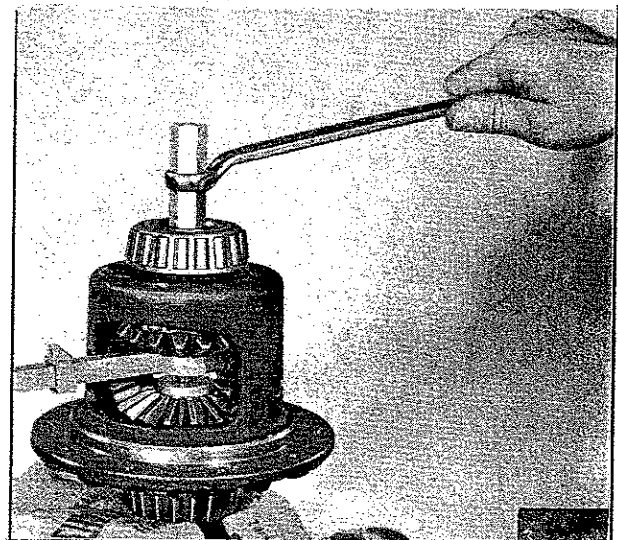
THREADING FORCING SCREW INTO ROTATING TOOL
